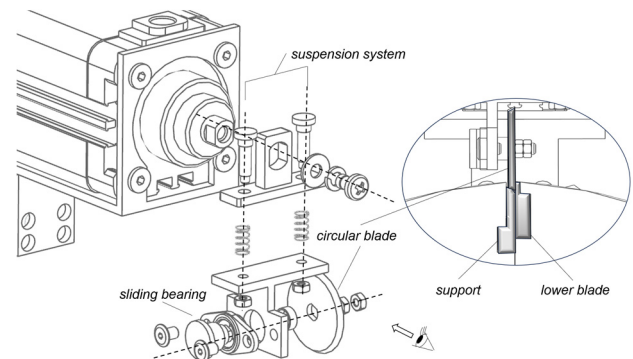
Partially exploded view of the cutting unit with a front view focusing on circular-lower-blade interface
